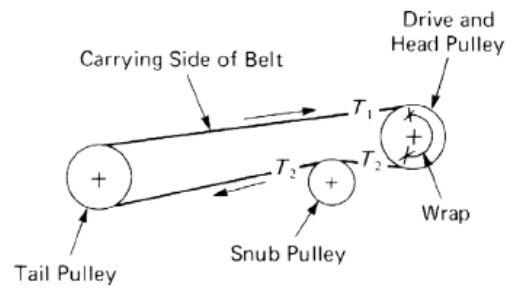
B Single-pulley drive at head end of conveyor with snub pulley.
